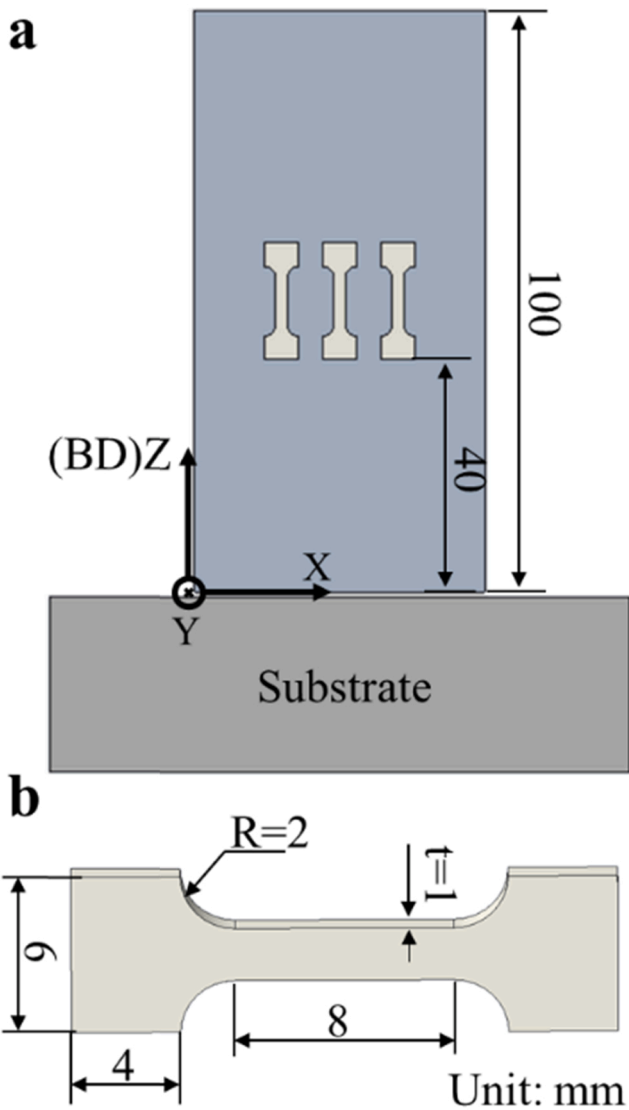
(a) Extracted position and (b) dimensions of tensile specimens in the cylinder WAAM-processed Inconel 625 alloy.
